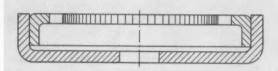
Above—Internal gears may be designed for stamping. The gear is made in two parts, the internal gear itself, and a separate back. A variety of joining methods may be employed.
